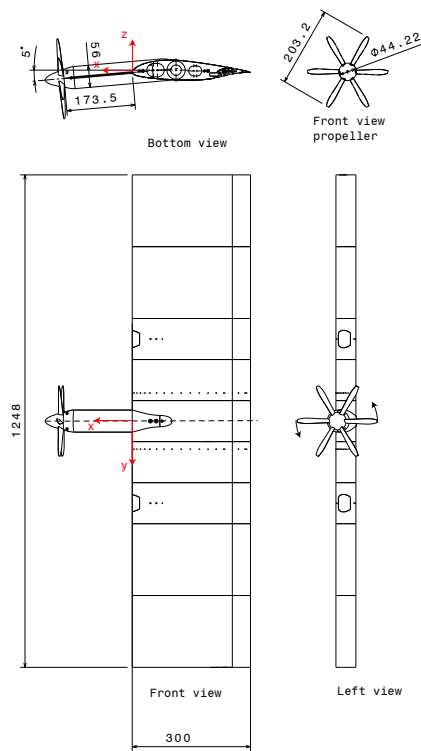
Technical drawing of wing model. Dimensions in *mm*.
